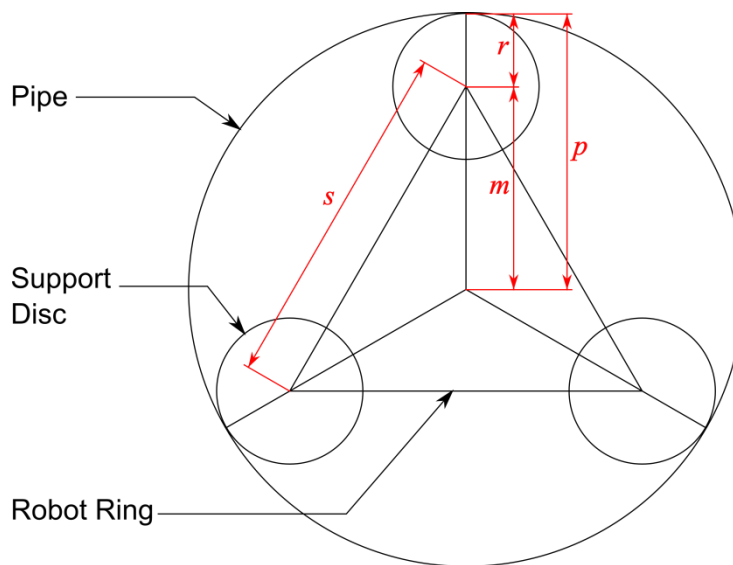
Geometric drawing to calculate the dimensions of the support discs.
